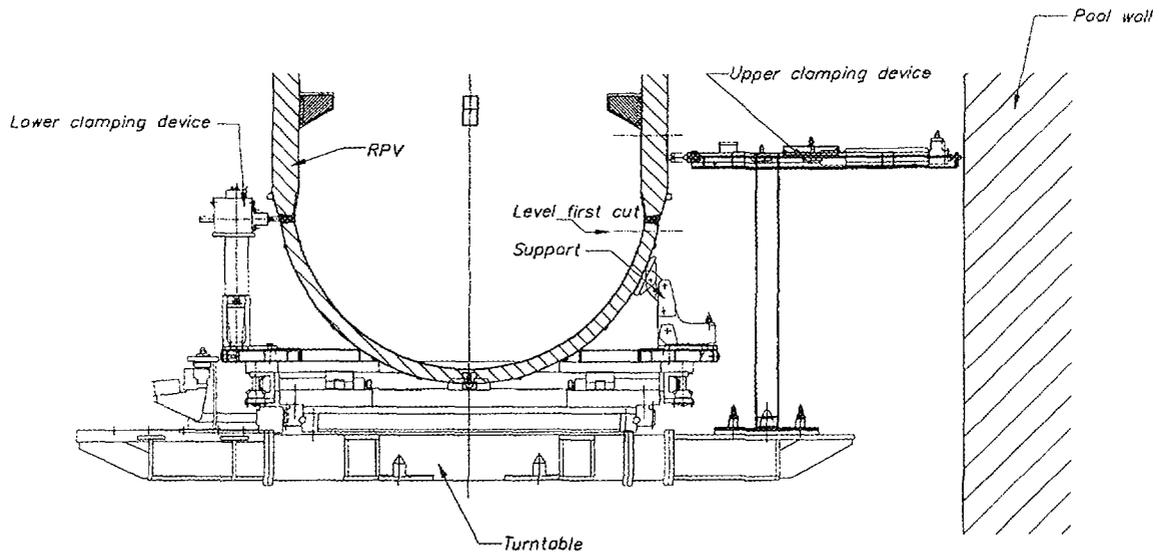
The spherical shape of the RPV bottom required additional clamping devices.
